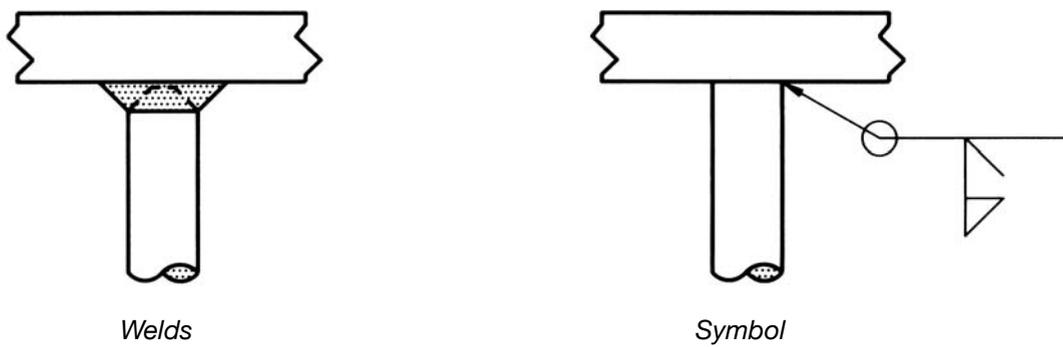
Weld Joint Designs (continued)
